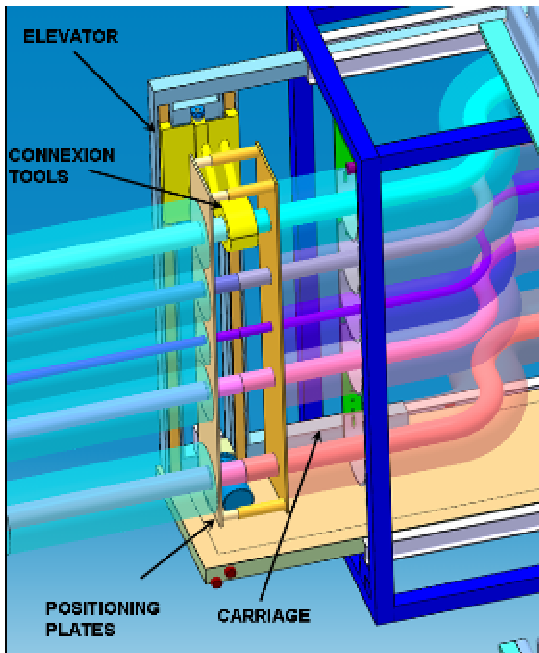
View of the interface 2 zone with cutting/welding tool, positioning plate
